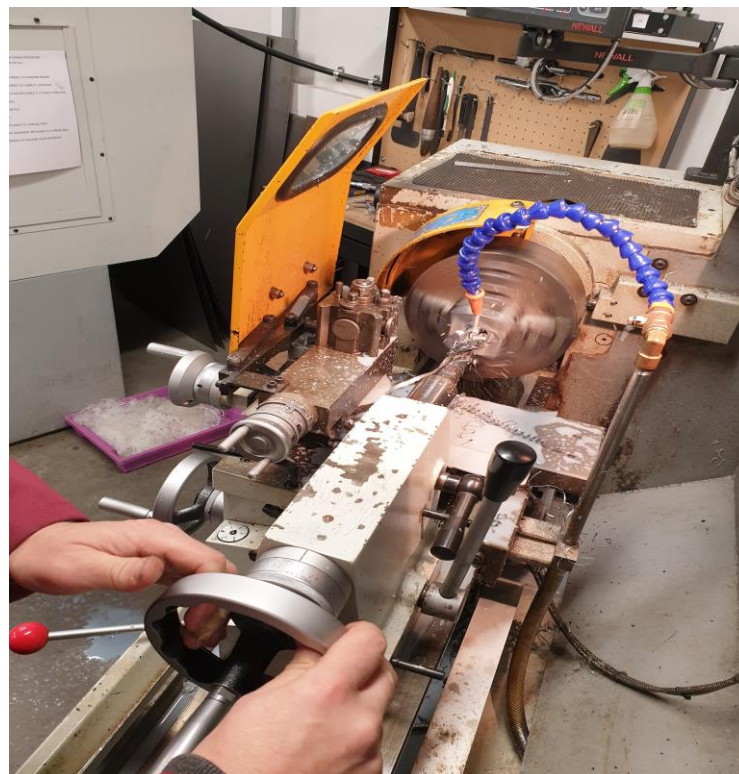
, 12 and 13 – showing the wobble bar into the centre and centre drilled, 13.7 drill and 14 reamer.
